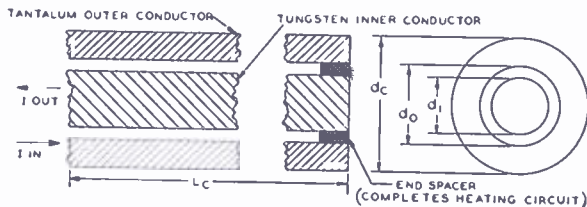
Cross-sectional view of coaxial tantalum cylinder cathode.
